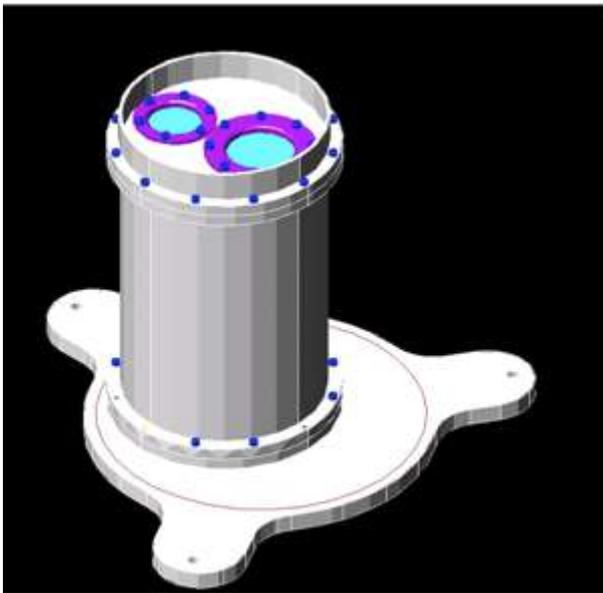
SQM/PMC assembly (top). Main mechanical frame (bottom).
